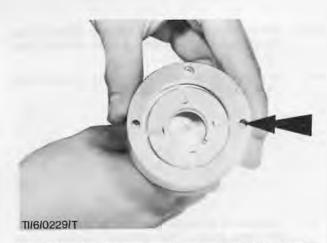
Hole fur:hest from inner edge positioned on right when viewed from above
